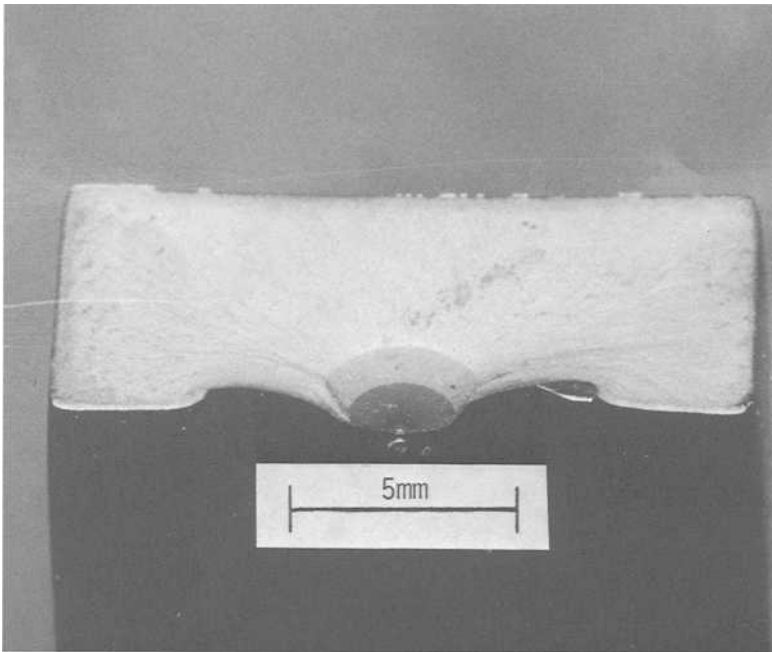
Photograph of a surface flaw test specimen of extruded and isothermally forged René 95 tested at 399°C (750°F) showing stable cyclic shear lips.
